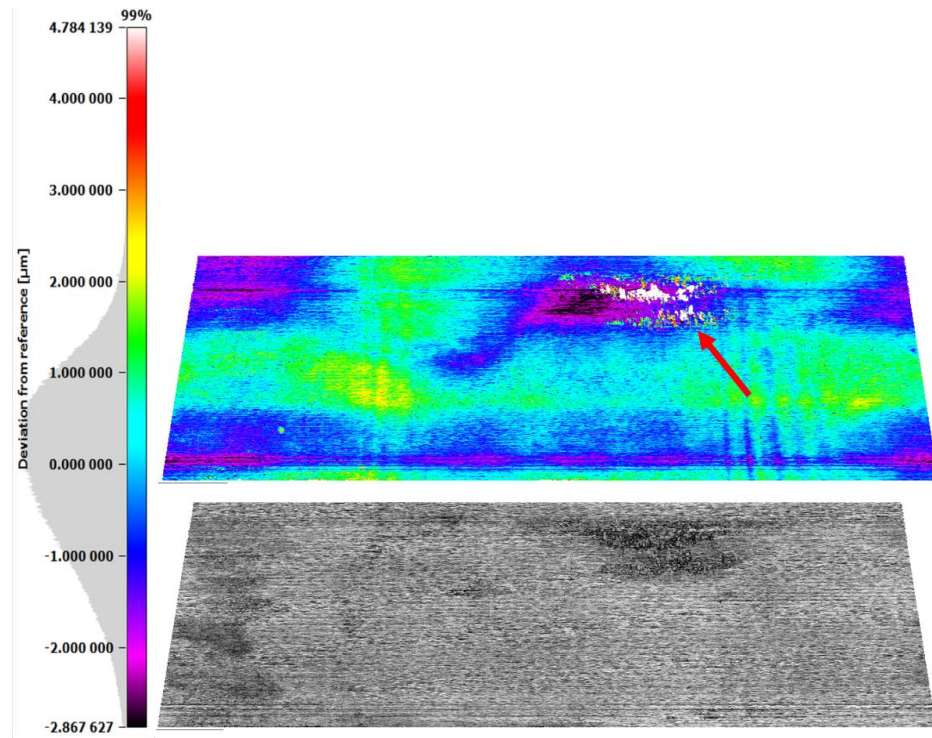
Head taper of TiAlV stem, S15, showing material transfer
